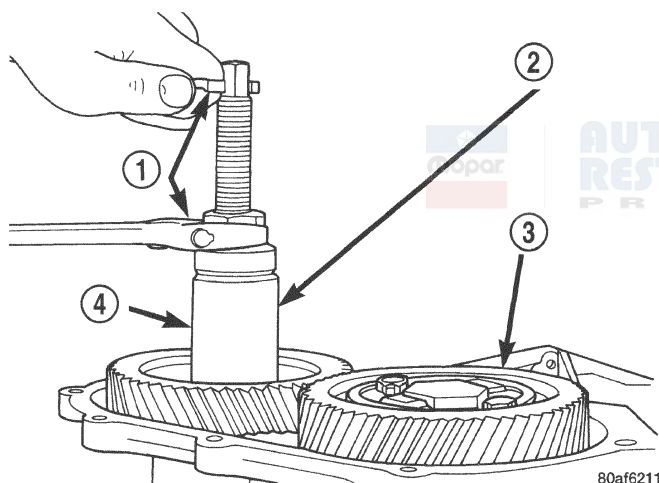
Transfer Shaft Gear and (Select) Shim
